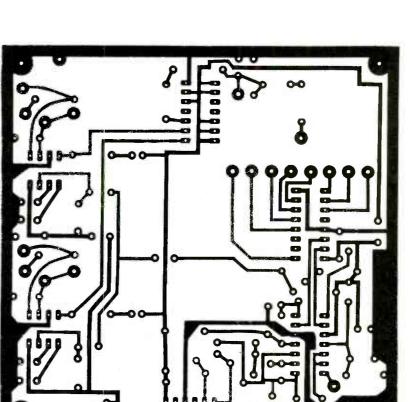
FOIL PATTERN for the single-sided decoder board is shown here full size.
